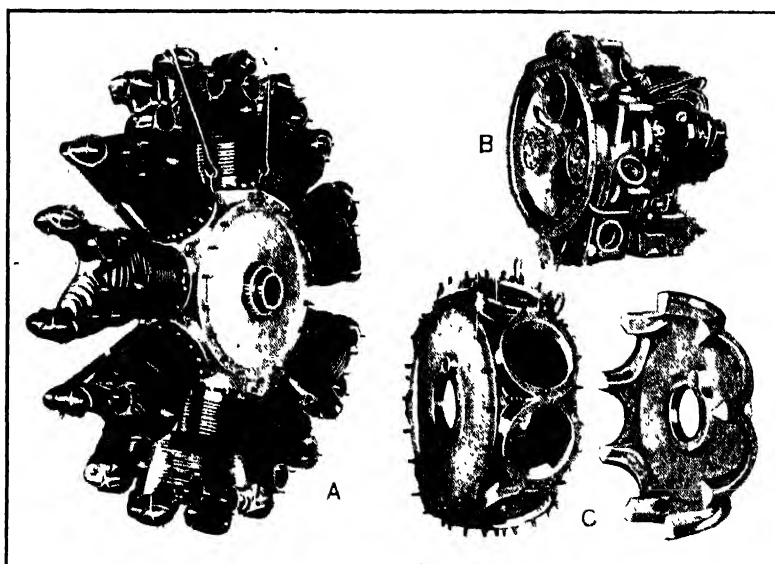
"Wasp" Cylinder and Crankcase Assembly at A can be Removed from Superchargers and Accessory Drive Assembly Shown at B. C—How Crankcase is Made of Two Duralumin Forgings and One of the Forgings before Machining.
